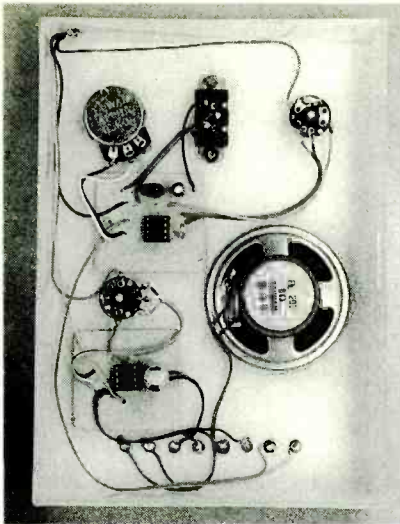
THE AUDIO MODULE is too simple to call for a PC board, so point-to-point wiring was used.
